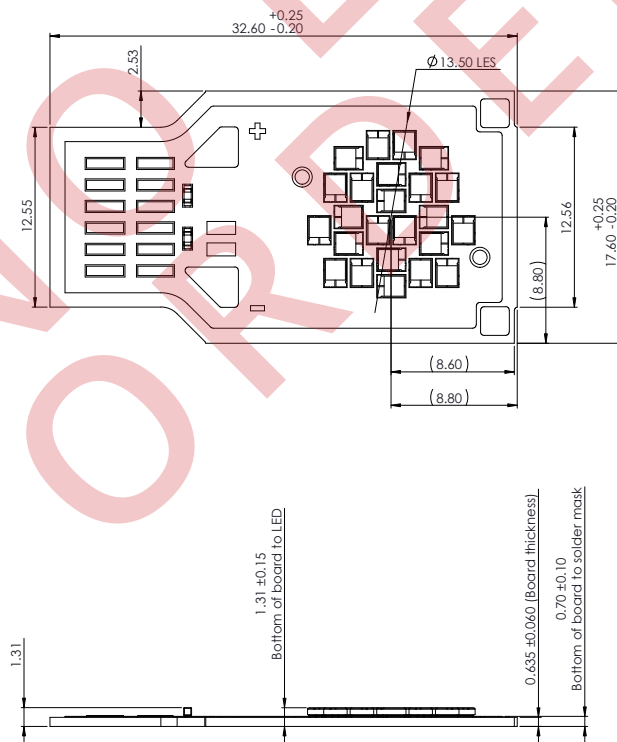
Package outline drawing for LUXEON S3000 / LXSx-Pxxx-0024N (Connector-less).
